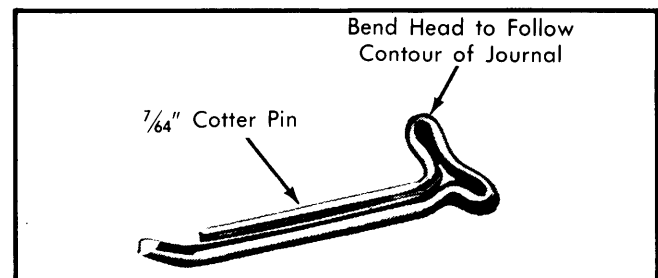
Fabricated Upper Main Bearing Removal and Installation Tool
